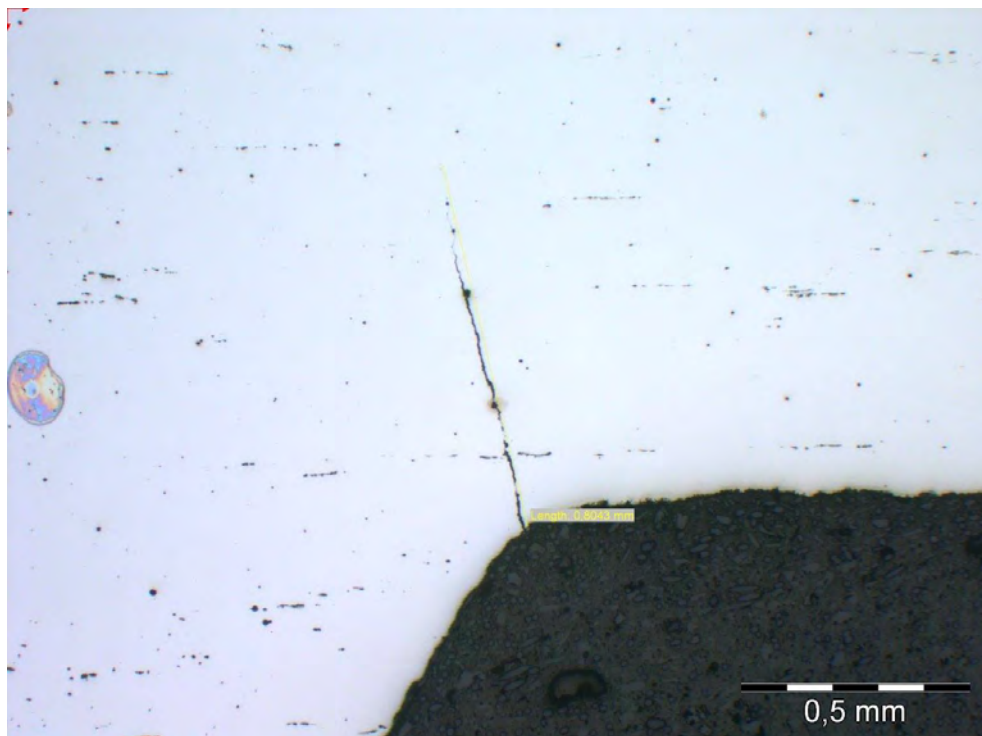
Crack at segment A, first ridge on barrel no. SFK 0123-A
